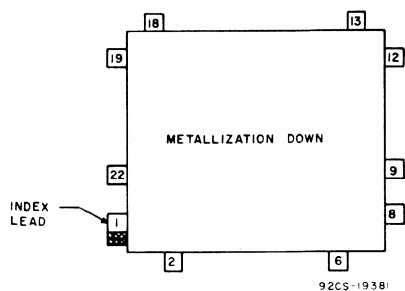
Terminal layout for CA3741L (22-lead configuration)
